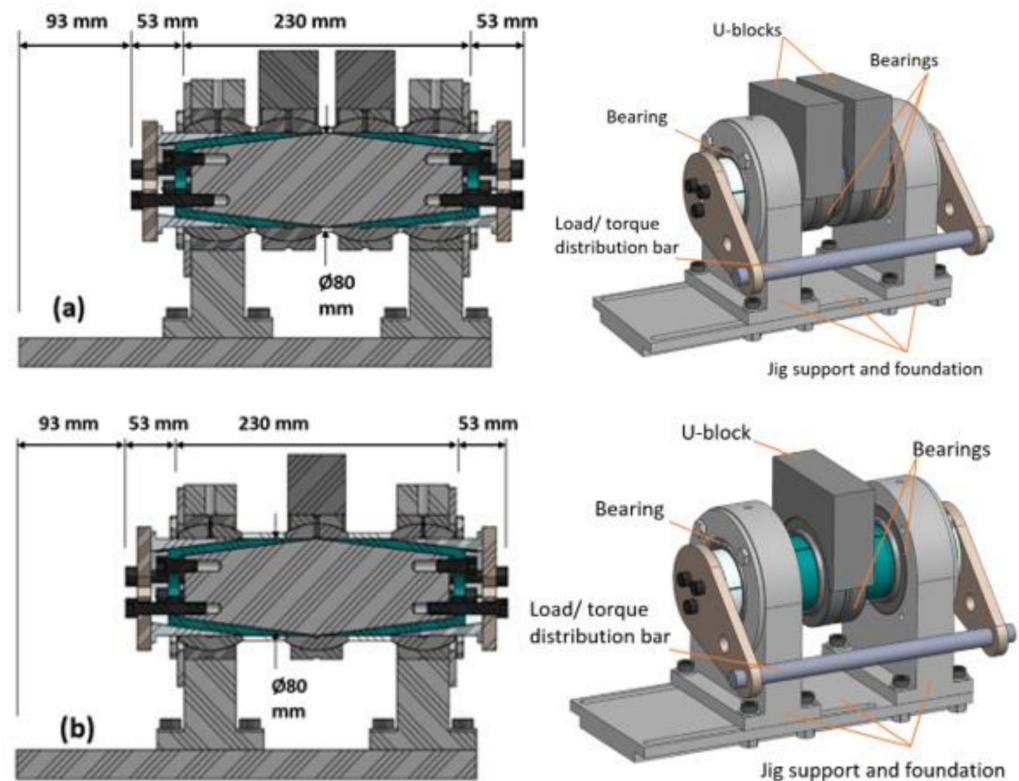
Test setup for Test 2: (a) Test 2a—cross sectional view (left) and view with isometric part names (right); (b) Test 2b—cross sectional view (left) and isometric view with part names (right).
